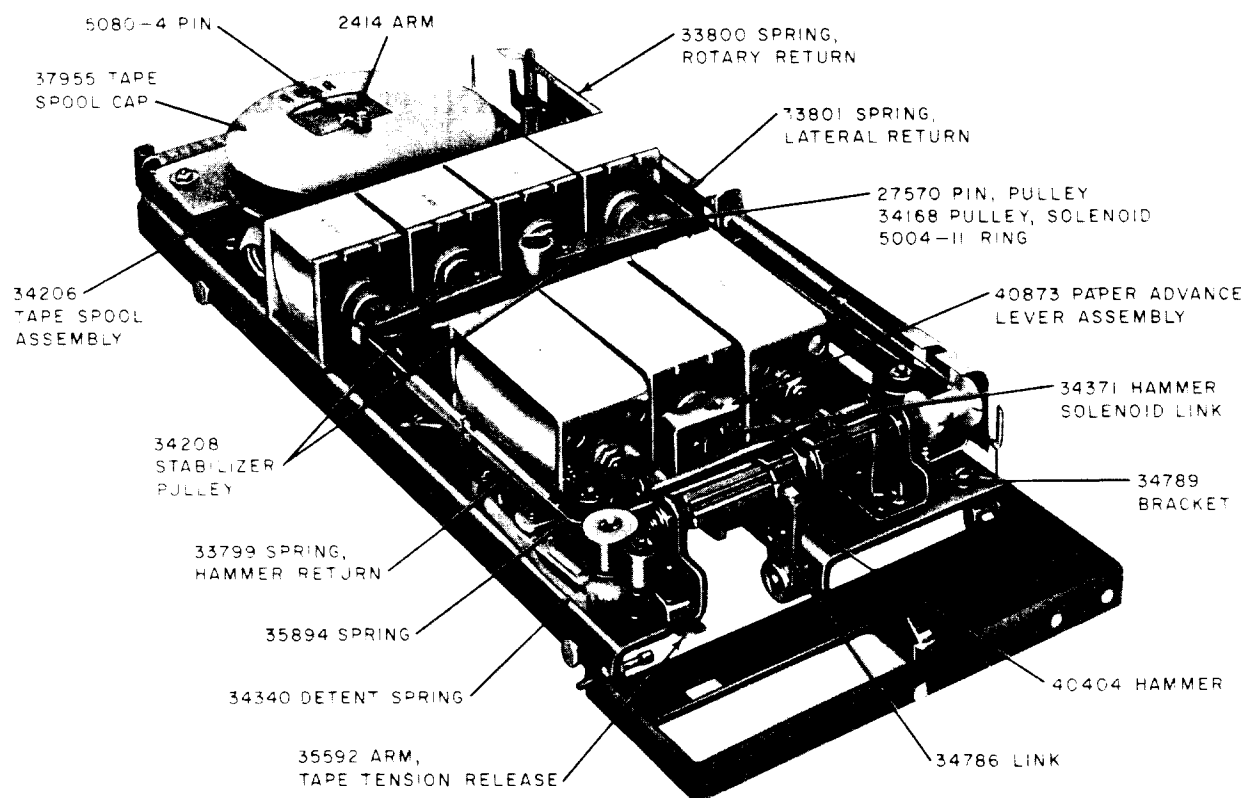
KS-19717 L6 Tape Printer—Cover Removed
